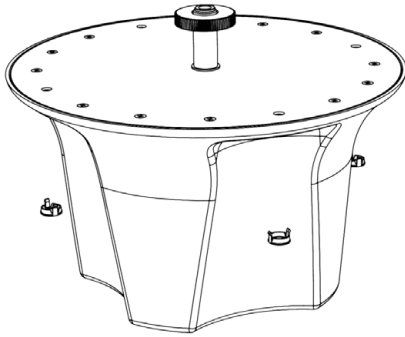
Set aside thumbscrew nut and screw caps. Mark and drill mounting holes.
